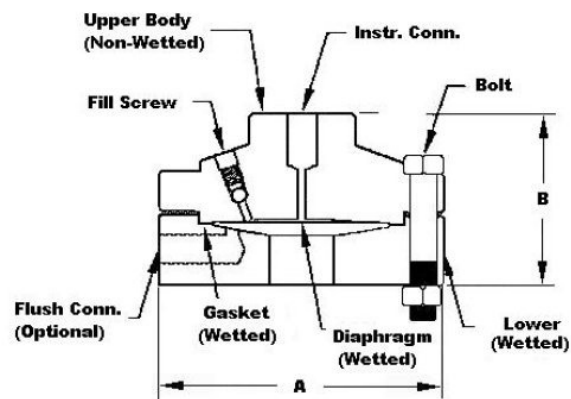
Seal Dimensions (Threaded Process Connection Seals)
